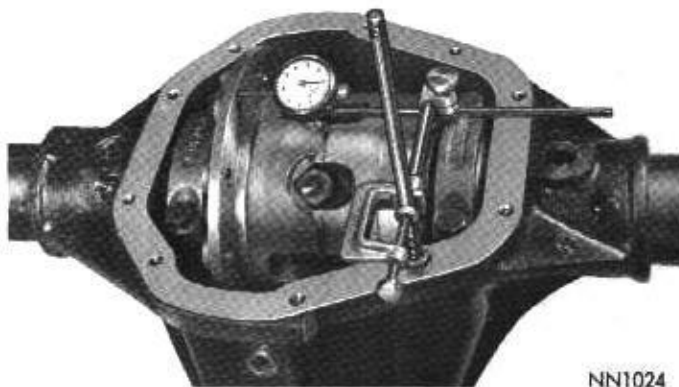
Measuring Differential Case Drive Gear Mounting Flange Face Runout
